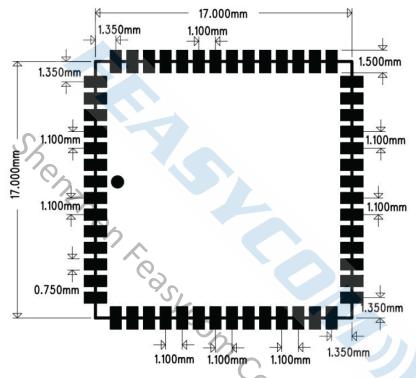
FSC-BW8202RC footprint Layout Guide (Top View)
